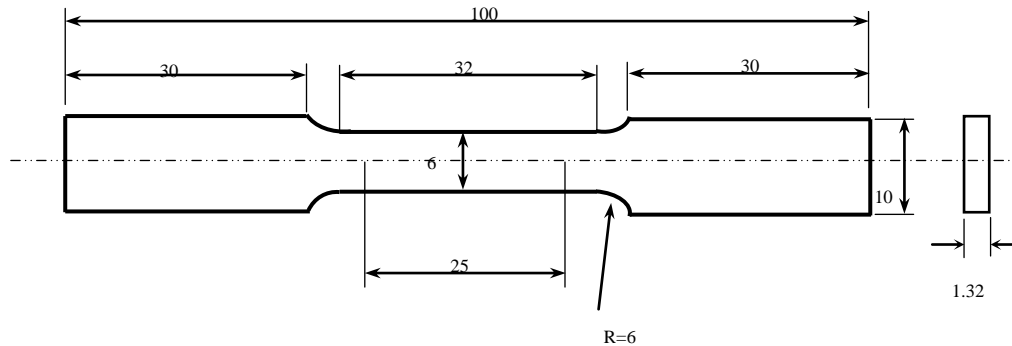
Specimen geometry and dimensions for tensile test (all dimensions in mm) According to ASTM E8.
